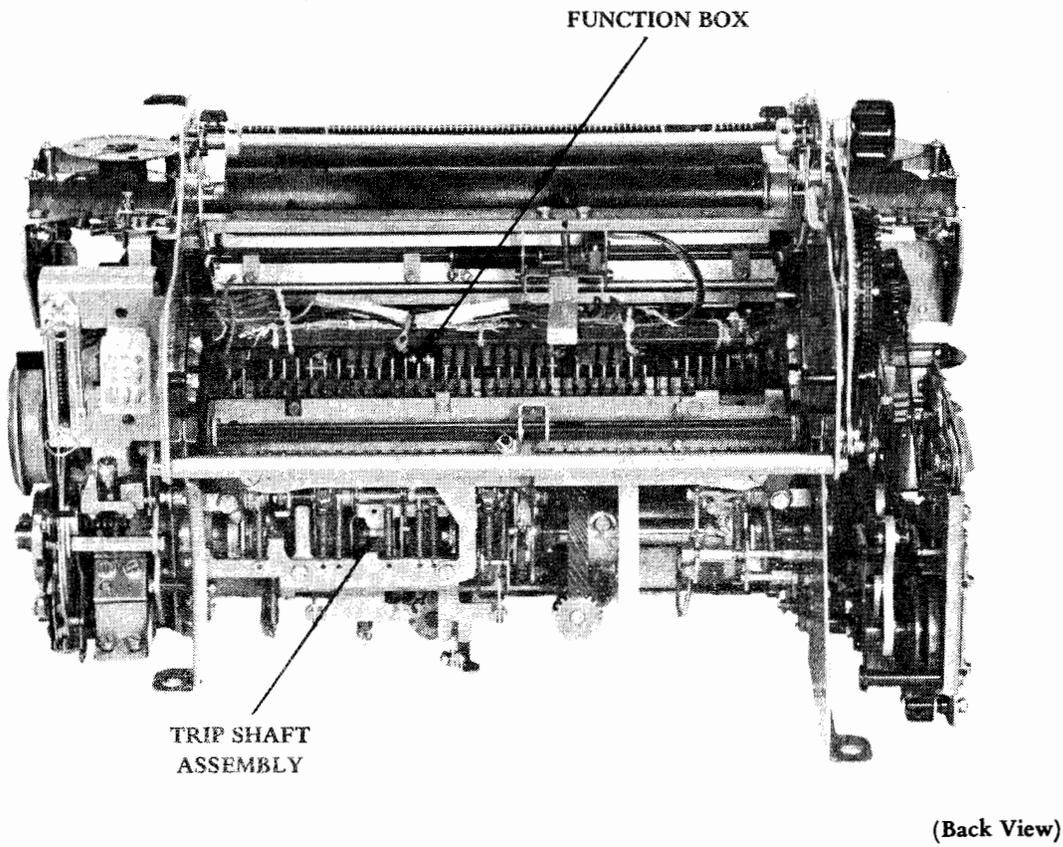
Function Box and Trip Shaft Assembly Mounted in Typing Unit
